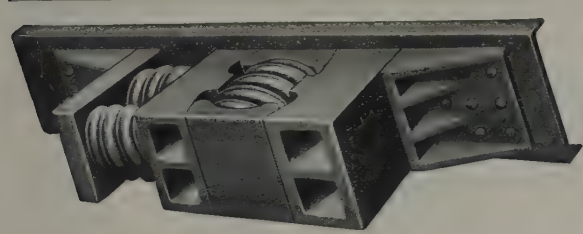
Butler Friction Draft Gear No. 370 with One Draft Sill Removed.
